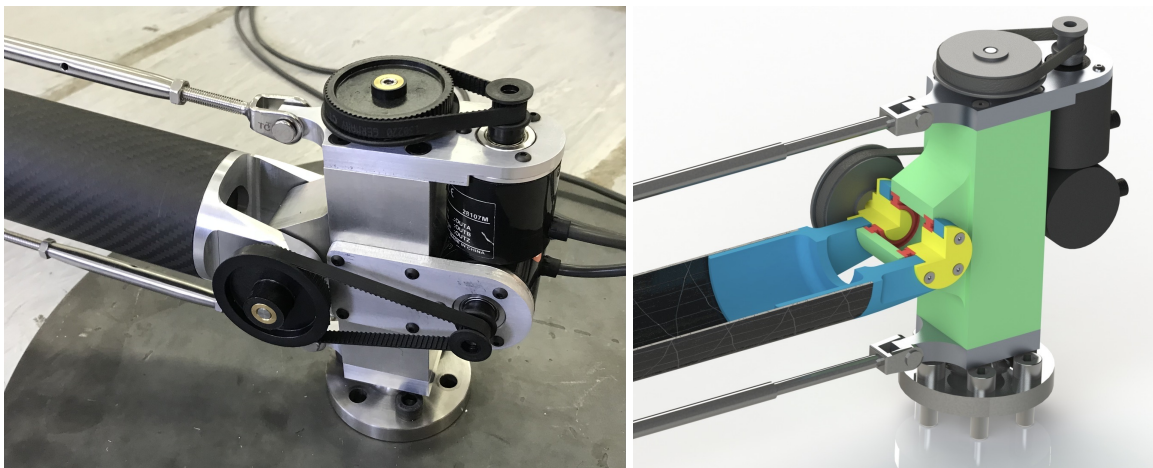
Centre pivot with encoders and 4:1 timing belt reduction (Left), and sectioned view (Right) of the elevation axis joint showing stainless steel shafts in yellow and bearings in red.
